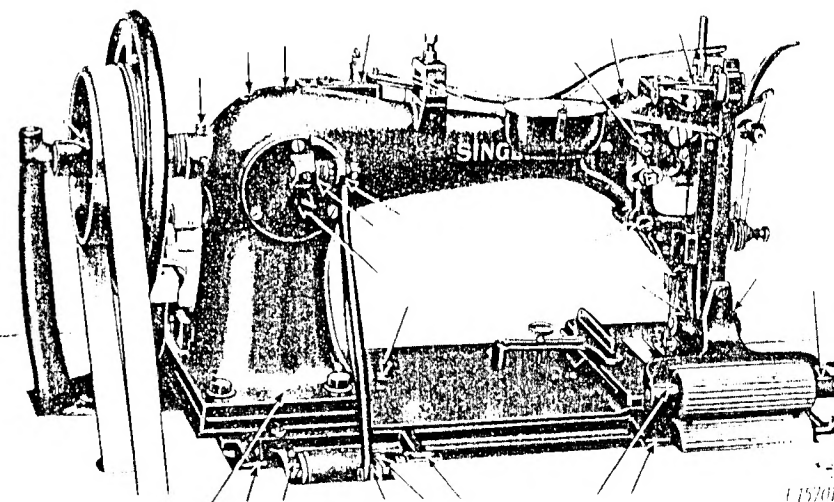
Oiling Points at Rear Side of Machine 7-57
